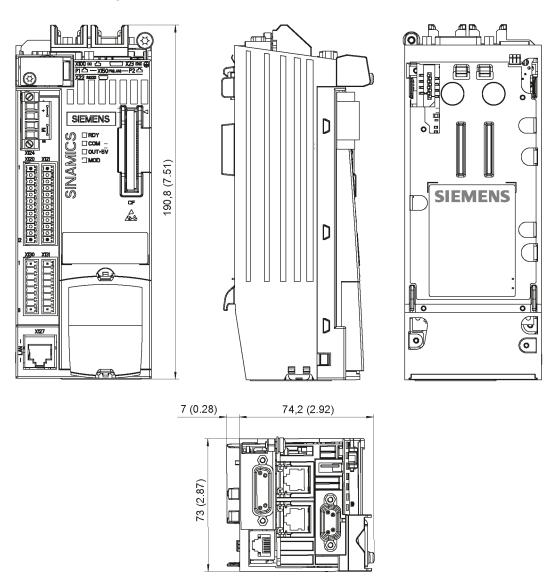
Dimension drawing, Control Unit CU310-2 PN, all data in mm (inches)
